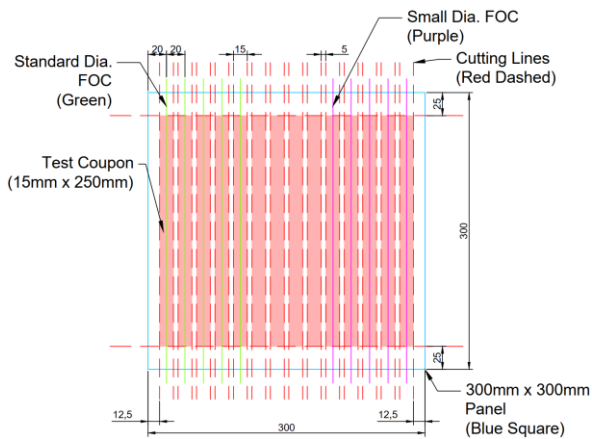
Parallel Panel Test Coupon Layout (units mm)
